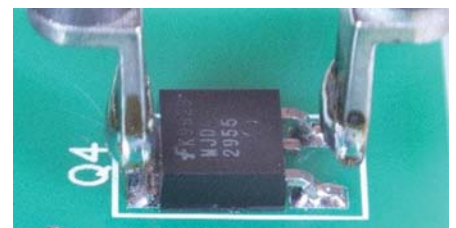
Lower Tips Over Component and Squeeze Handpiece.
